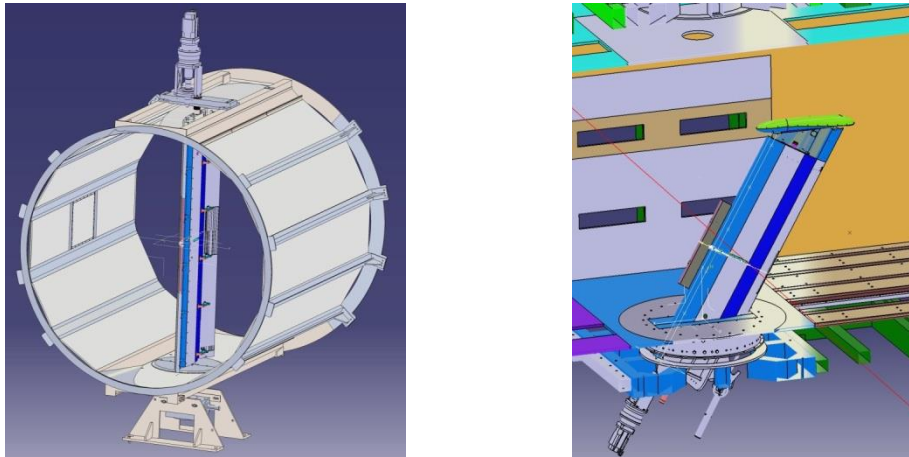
installation of DLR-F15 wind tunnel model in (left) ONERA L1 and (right) DNW-NWB wind tunnels
